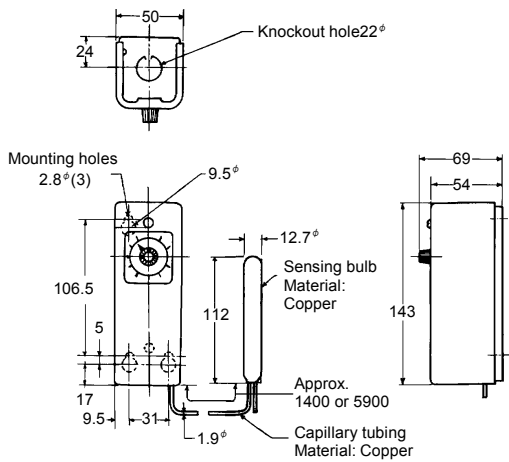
Approximate dimensions of T675A and T678A (mm)
